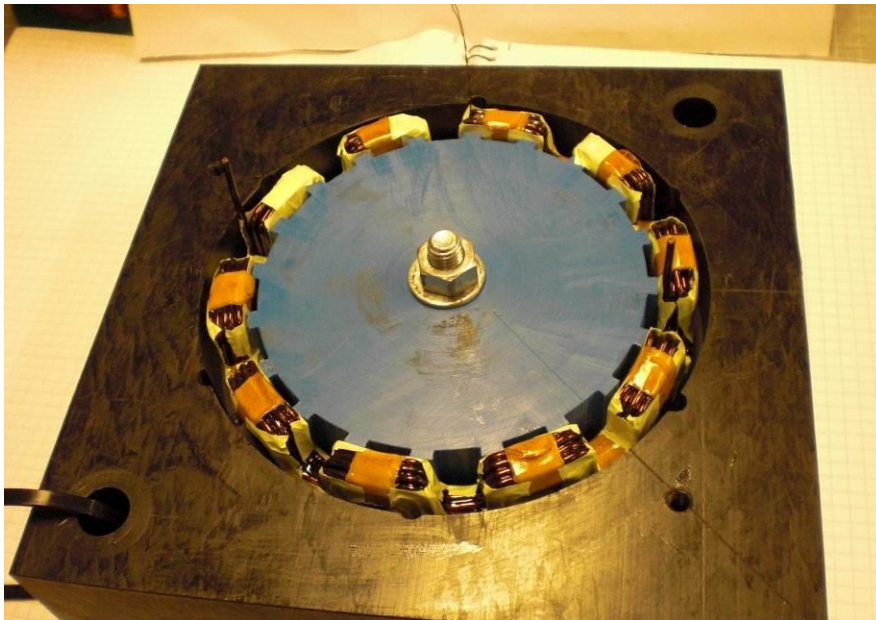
The mould with stator winding 1 placed in it just before moulding.
